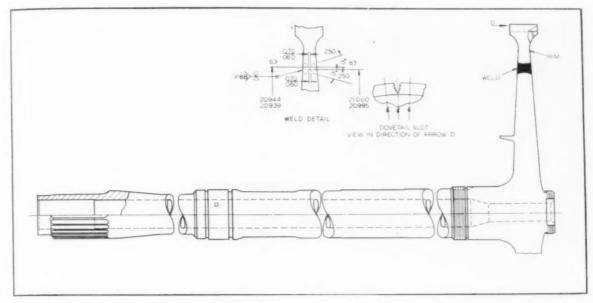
Outline drawing of turbine shaft and wheel showing welded rim, dovetail detail, and through hole.
